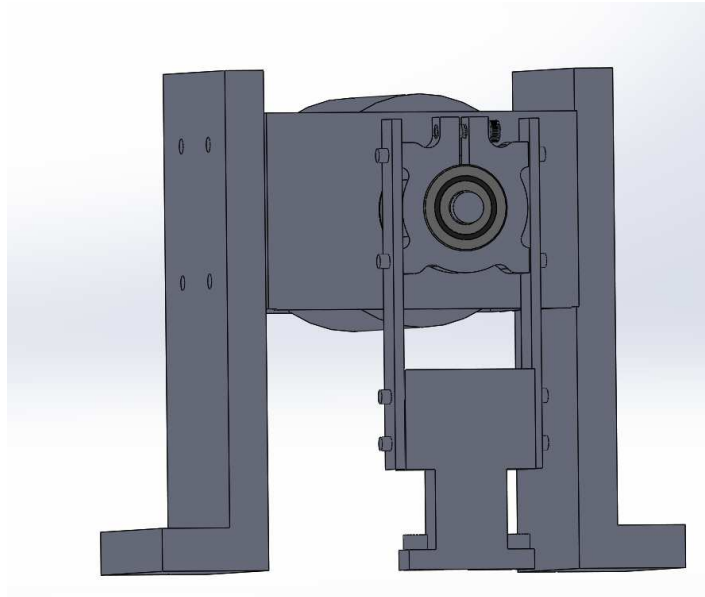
23: 3D CAD drawing of motor shaft is supported by a bearing mount at the tip of the shaft.
